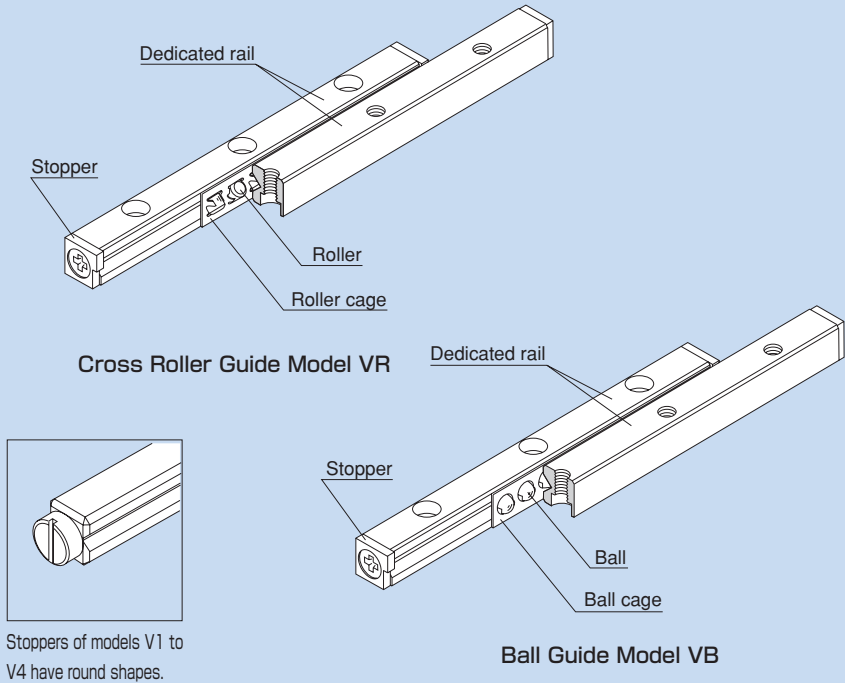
Structure of Cross Roller Guide Model VR and Ball Guide Model VB
